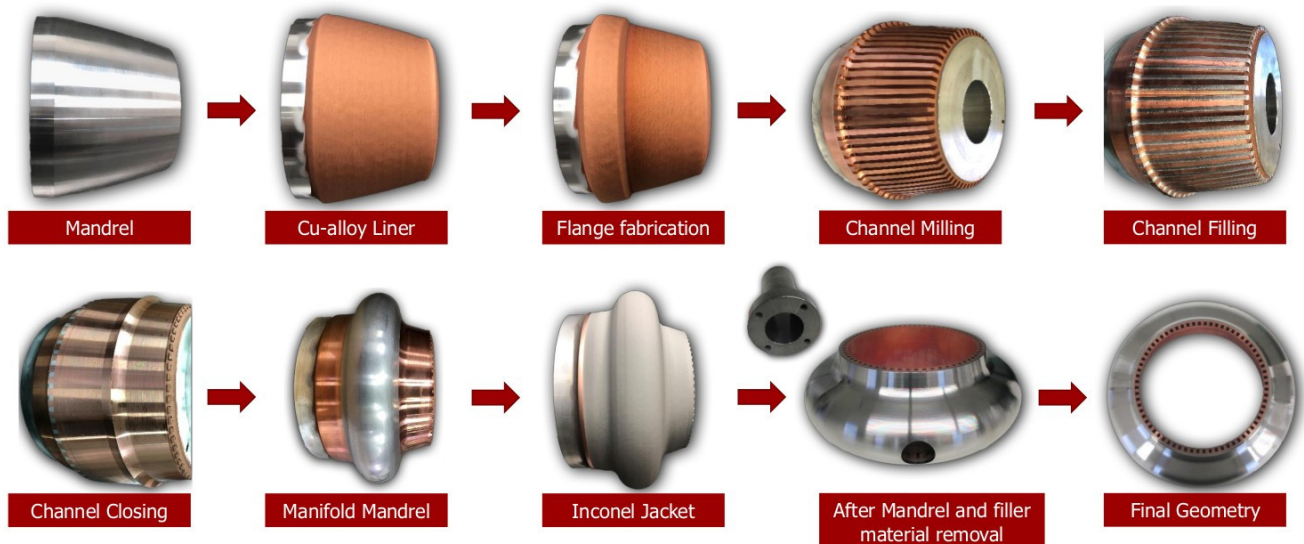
Manufacturing steps for the CSAM manifold demonstrator: liner fabrication, channel machining, filling and overspray.
